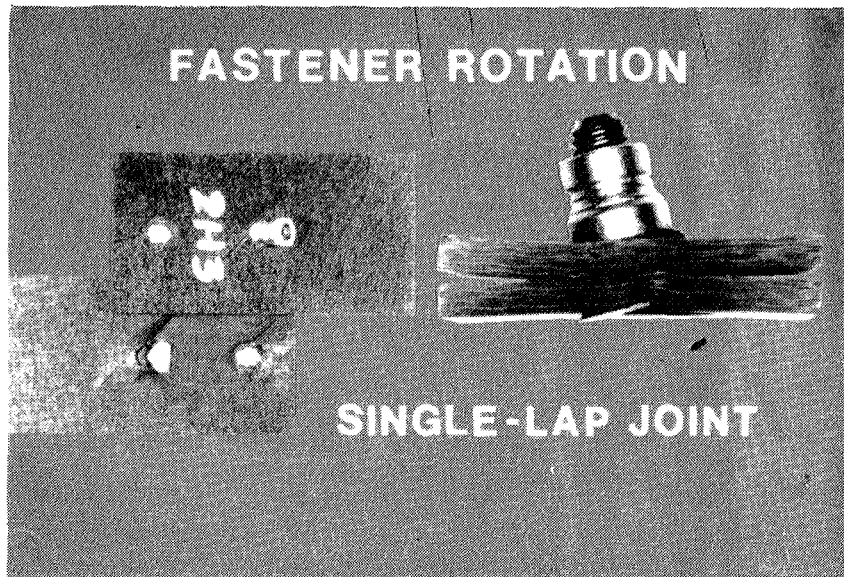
Single-lap joint illustrating fastener rotation failure.
